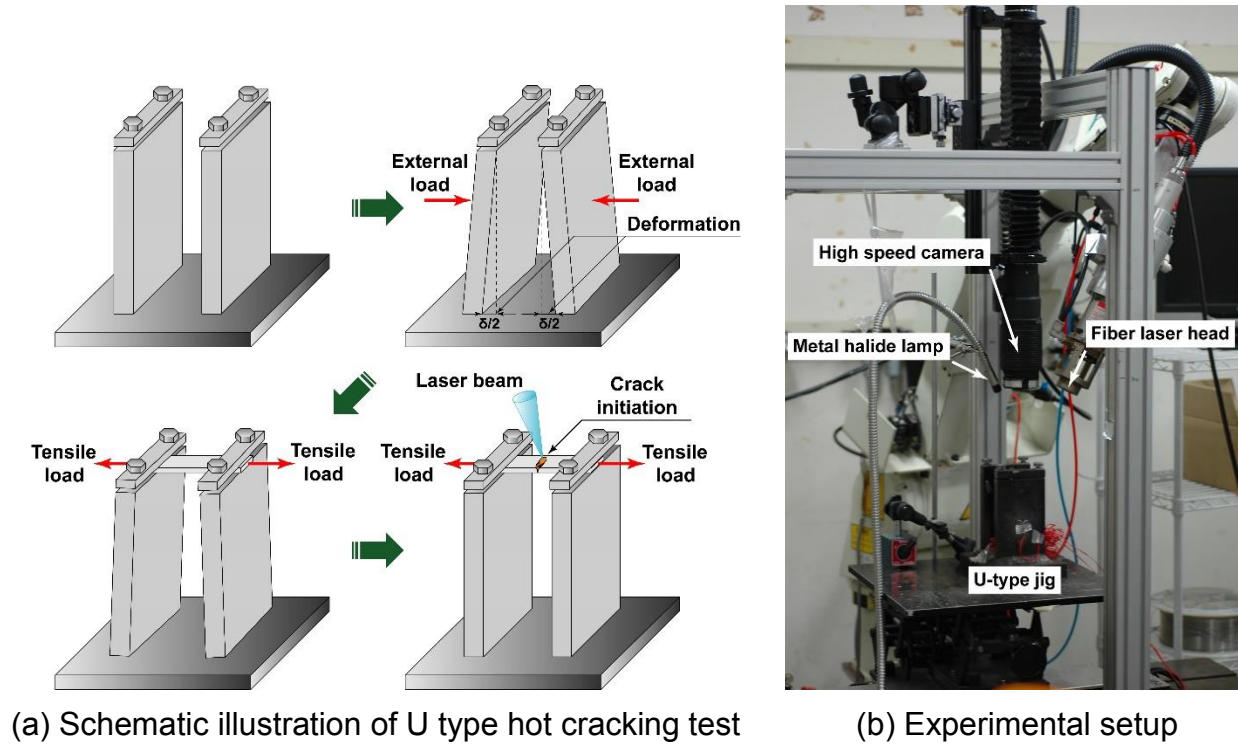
U type hot cracking test with in-situ observation [51]
